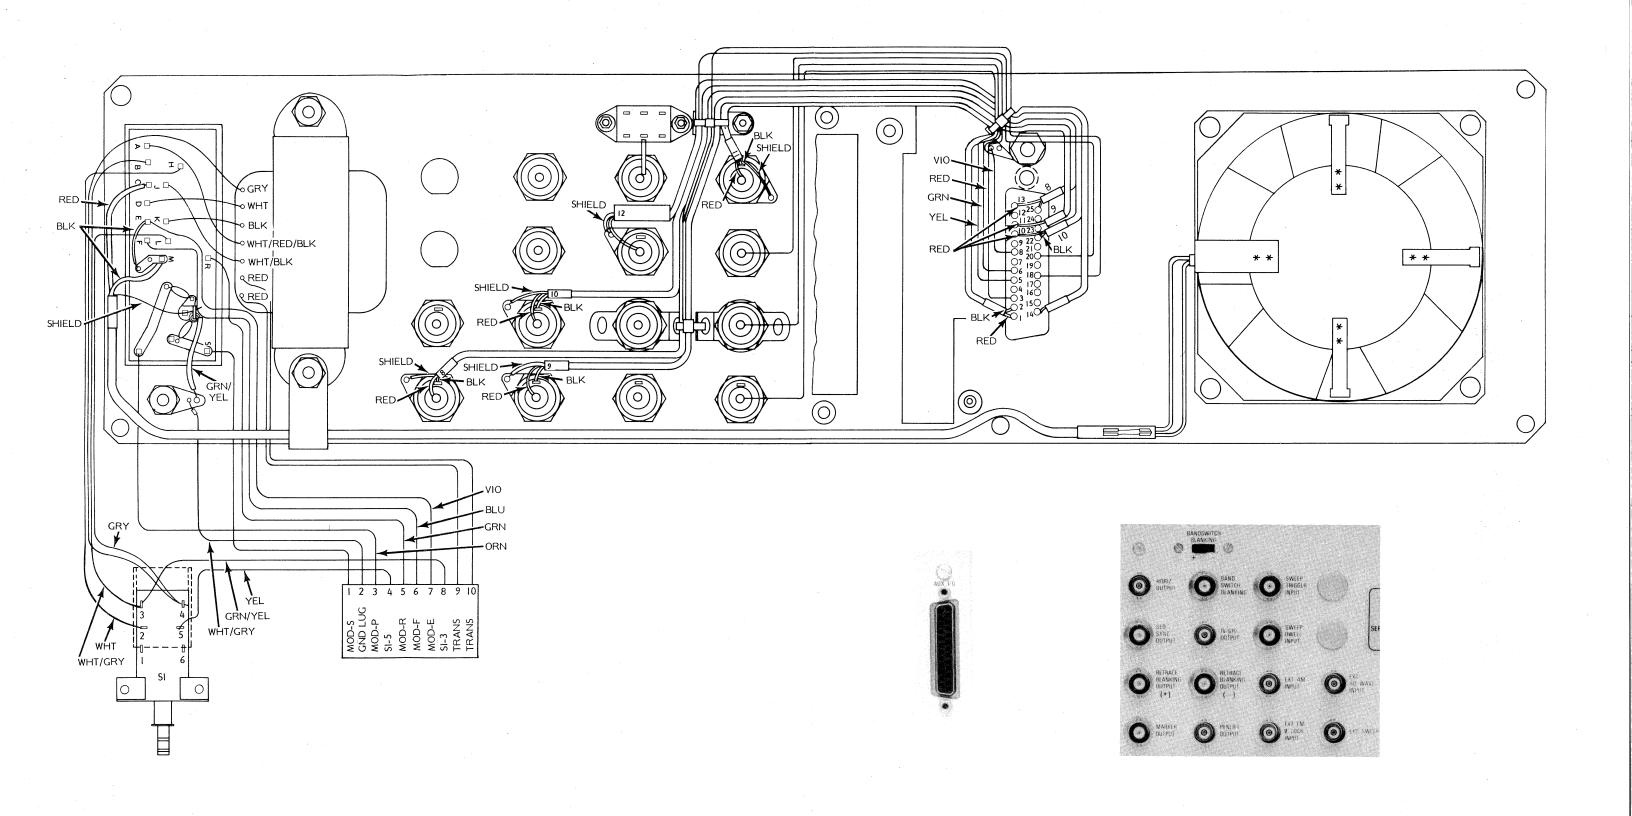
B. Rear Panel Wiring (Sheet 2 of 2)
